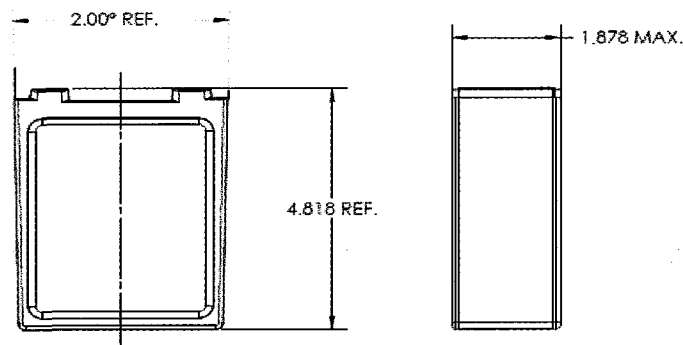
Side and Edge Dimensions (in) of LIB Cell Module
